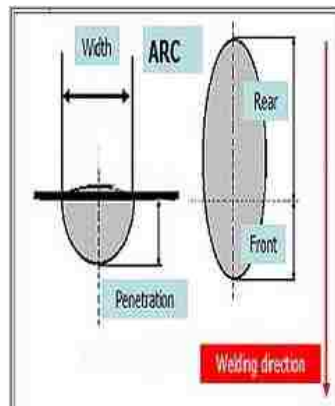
The estimated dimension for the arc of welding from SYSWELD
